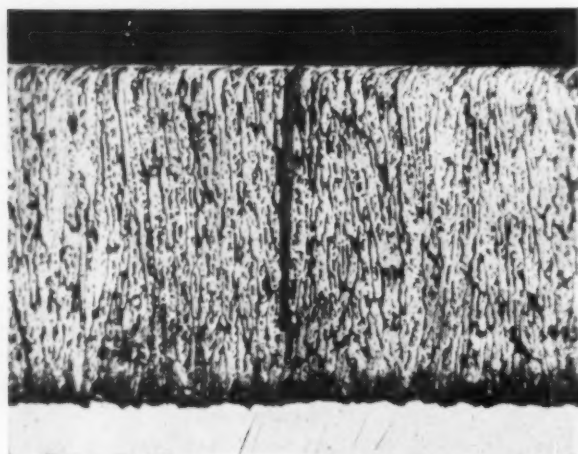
BROACHED BEARING SHOWS DIRECTION OF BROACHING
